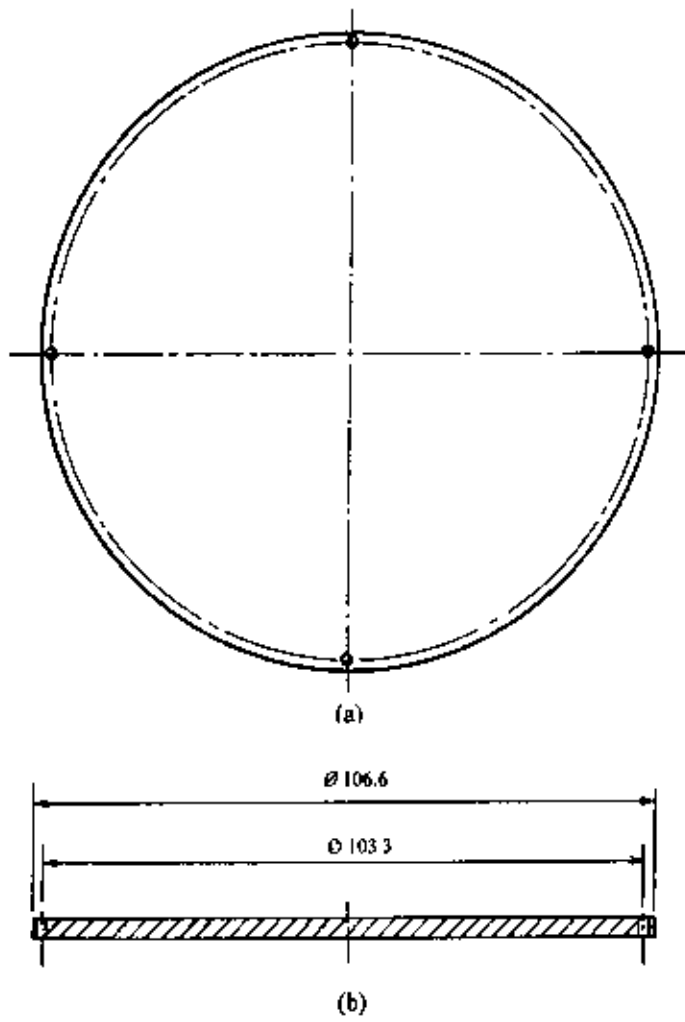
(a) Cross-sectional view and (b) lateral view of the cover electrode of P60A Ionization Chamber (all dimensions are in mm)
